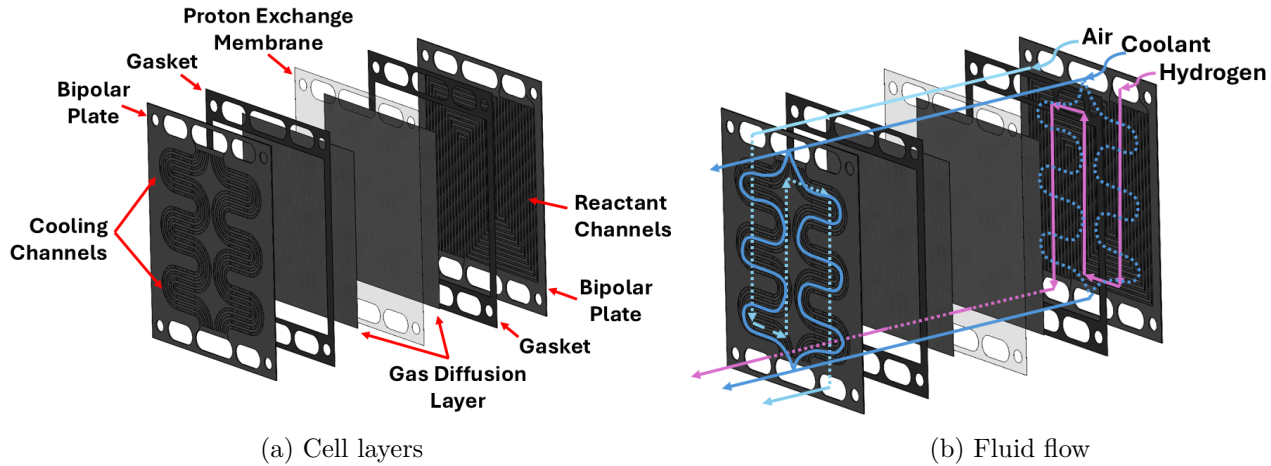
Wyvern* PEMFC cell - exploded view
